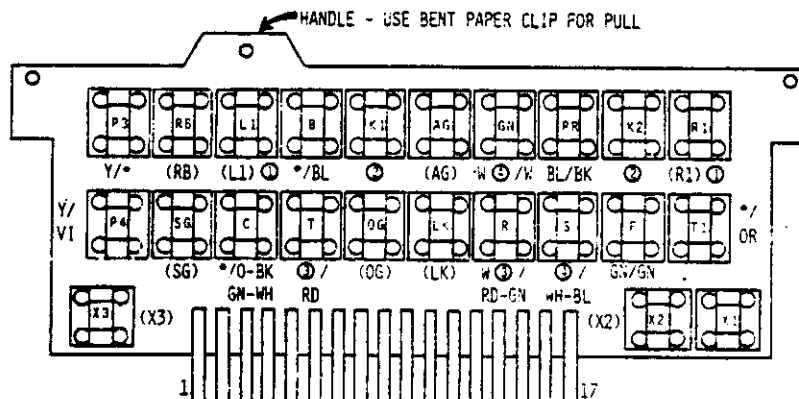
Dial Terminal Board (DTB) Terminal Layout
